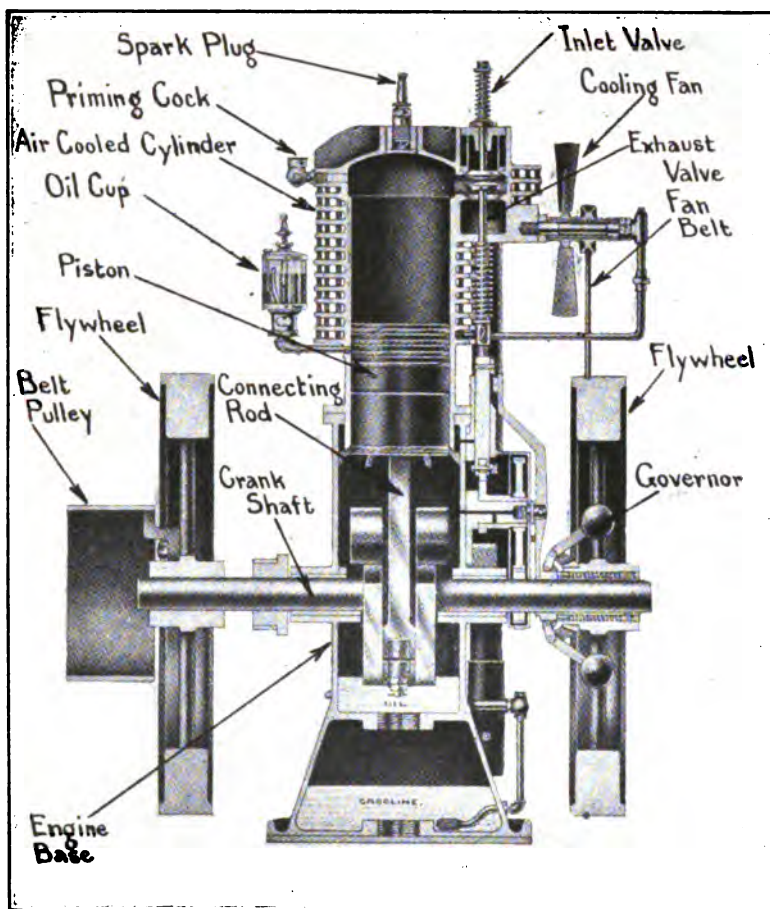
Sectional view of simple air cooled engine, showing internal construction.
